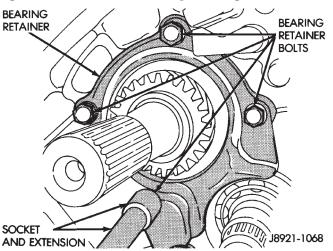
Remove Output Shaft Rear Bearing Retainer
